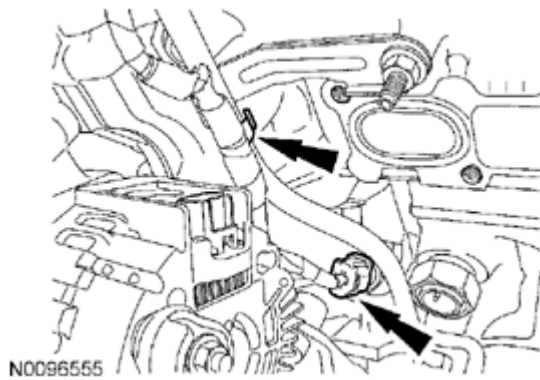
Locating Engine Oil Pressure Switch Electrical Connector And Wiring Retainer Of Oil Indicator Tube
